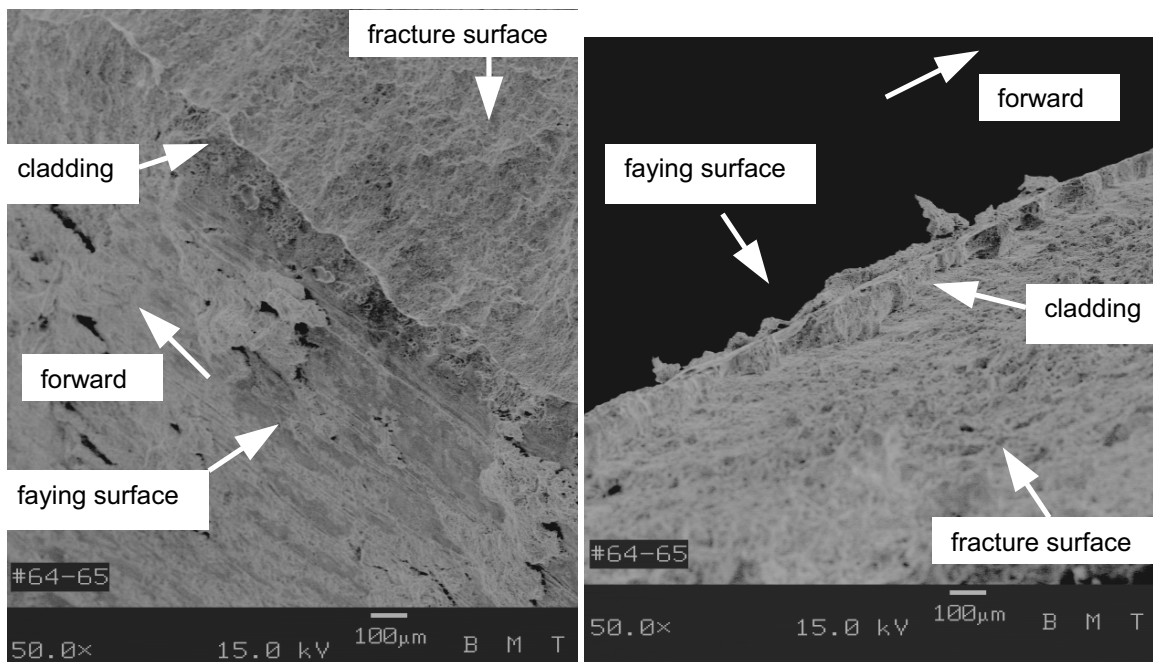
, opposing angle SEM photographs of the fracture segment between Holes 64 and 65 showing the cladding on the faying surface retaining its upward profile from the necking process during ultimate tensile separation without subsequent crack closure.
